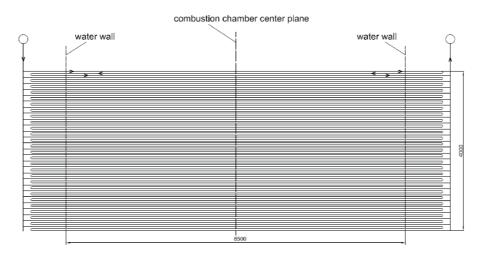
The platen which includes 81 serial tubes forms the 27 three-pass tube sets.
